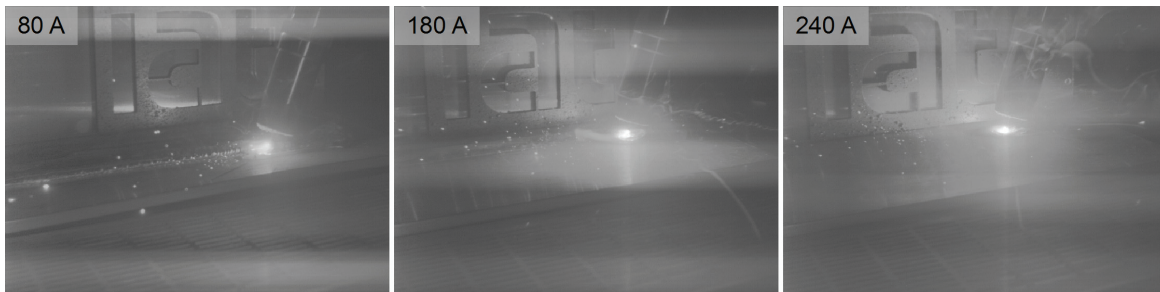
Original camera image for MIG welding process
